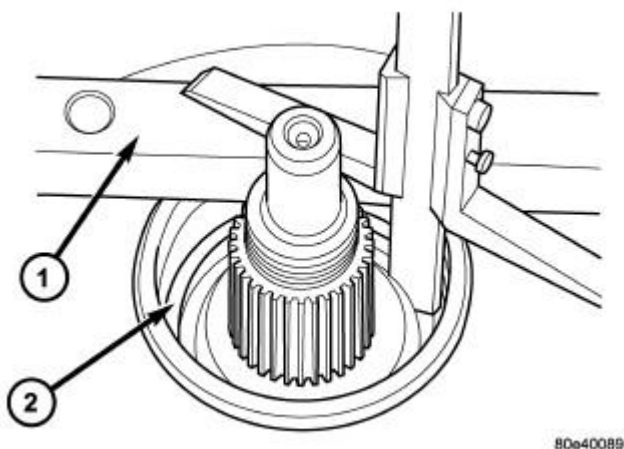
Measuring From Transmission Housing -To- Rear Bearing Contact Surface
